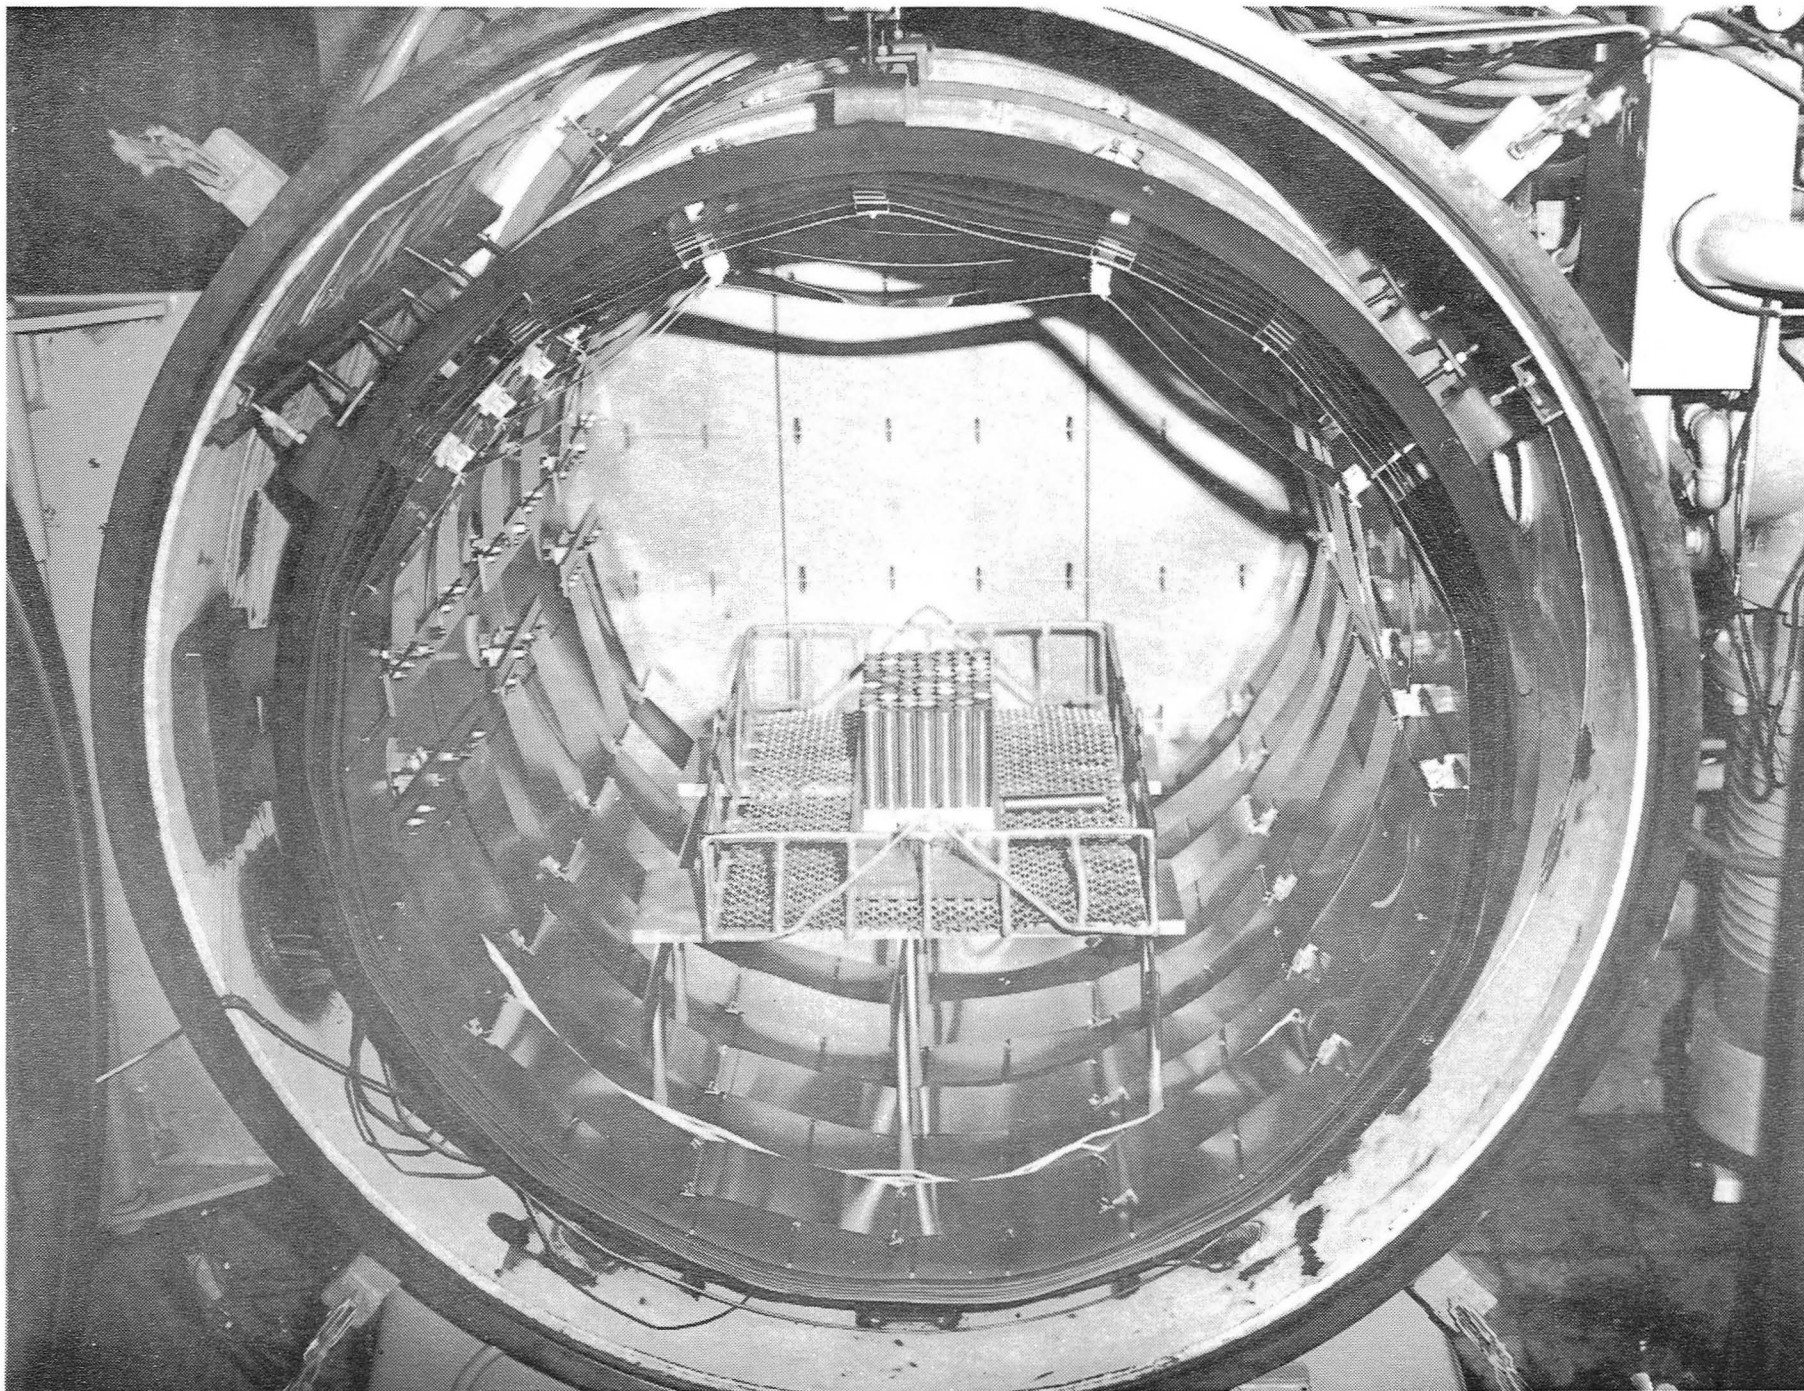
Symmetrical airfoil model positioned in vacuum brazing furnace, with cylindrical weights in place.
